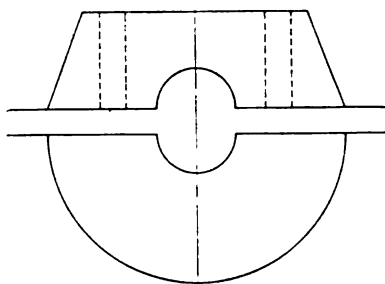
Bearings in both upper and lower halves of crankcase.
